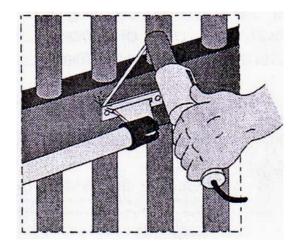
Weld the front mounting bracket into position after insuring the operator is level.
